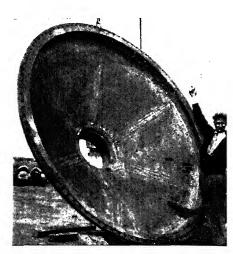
Copper lining in dished head for petroleum refinery still, completely oxwelded with a special copper alloy welding rod.
